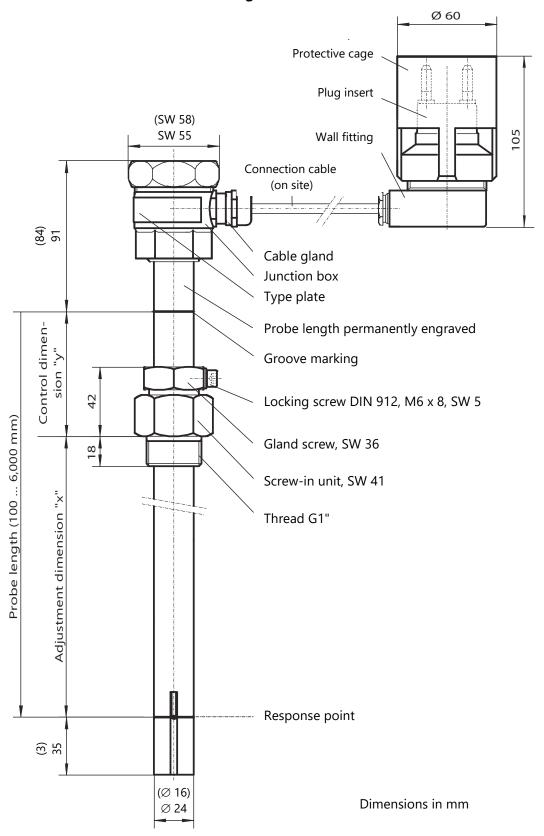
Overfill Prevention Sensor 81 D-Ex with wall fitting
